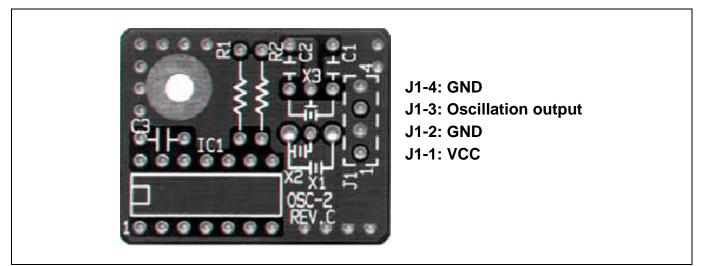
External view of the oscillator circuit board OSC-2 and its connector pin locations
